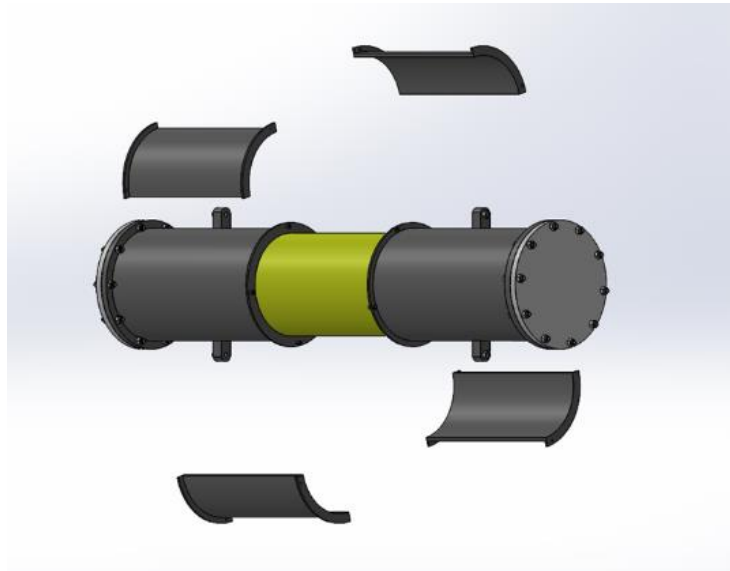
Internal Pressure Testing Specimen, showing the middle PIP unconfined section (DS SolidWorks®).
